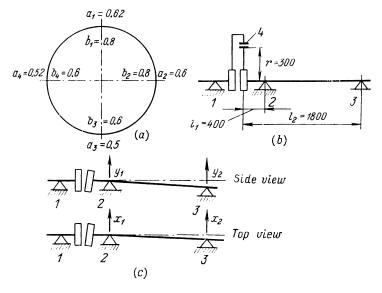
Alignment of shafts by means of a pair of radial-axial fixtures (see example)
